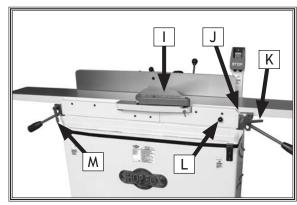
Table locks, cutterhead guard, and depth-of-cut scale.
